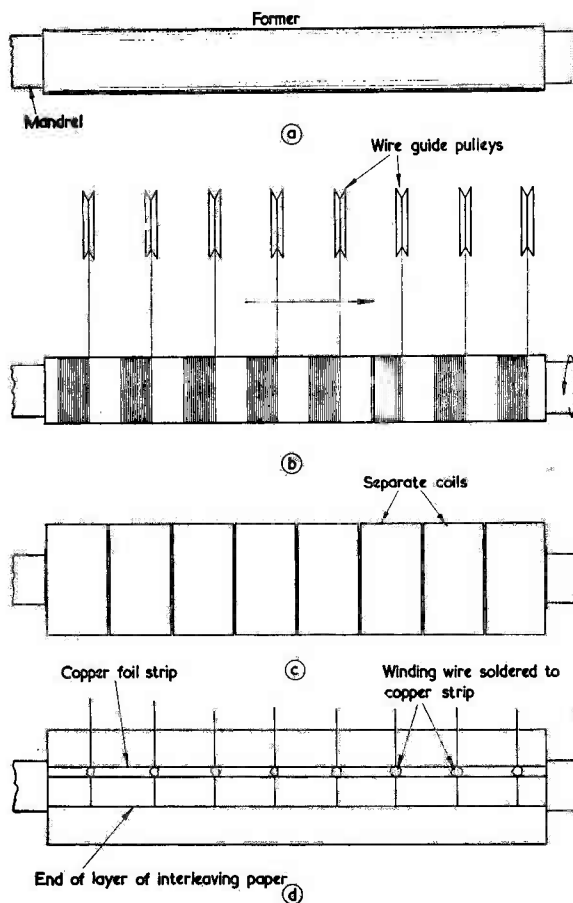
Showing, in simplified form, how a stick of multi-layer coils is wound. In (a), the former is fitted to the winding machine mandrel. The coil is partly wound in (b), in which diagram the mandrel rotates on its axis whilst the wire guide pulleys move laterally so as to lay the wire evenly. In (c), the completed stick is parted, after being covered with an insulating paper tape, into its separate coils. The process of making connections with copper foil strip is shown in (d). The unwanted projecting wires from the joints are cut away after soldering. In a practical winding procedure, the former, interleaving paper and copper strip would be wider than is required for the coils themselves, the waste material at the ends being cut off after the stick is completed
